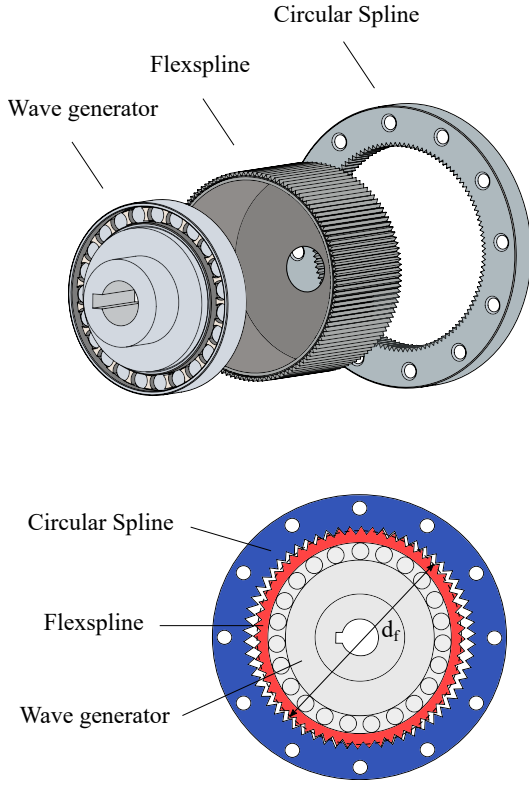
Exploded view of the different parts of a harmonic drive (top) and a detailed cross-section view of it (bottom).
